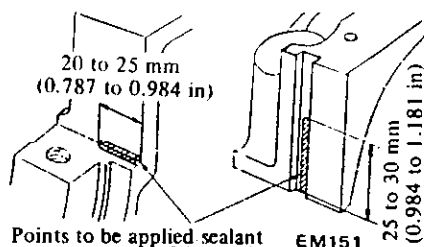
Applying sealant (Main bearing cap and cylinder block)
